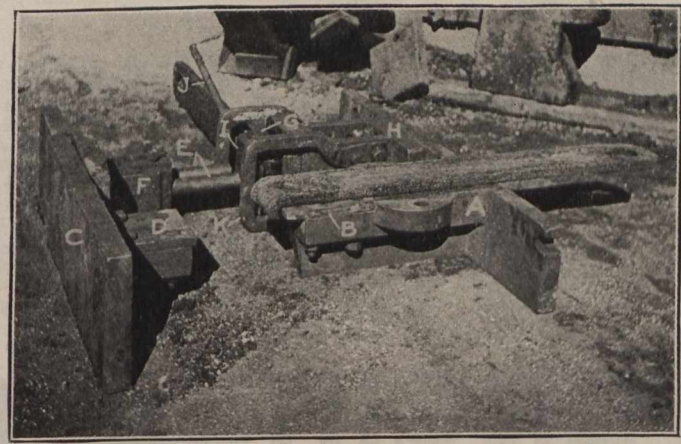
Second and Third Operations of Trimming and Punching the Ends of the Car-coupler Pocket.
